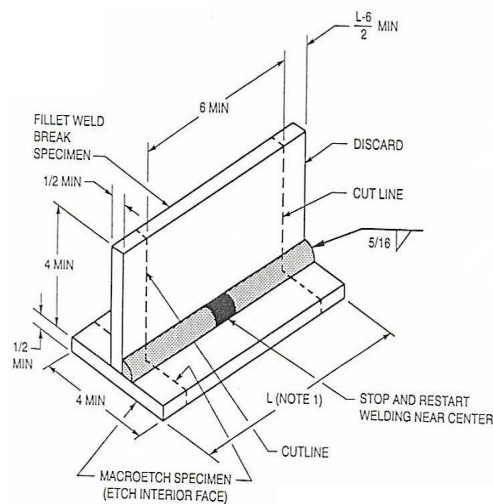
Fillet Weld Break and Macroetch Test Plate
